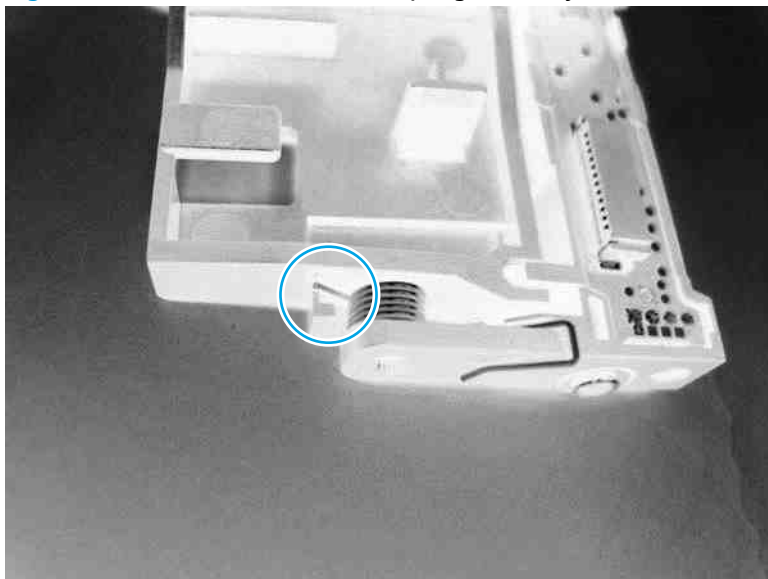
Remove the scanner spring assembly (2 of 2)
